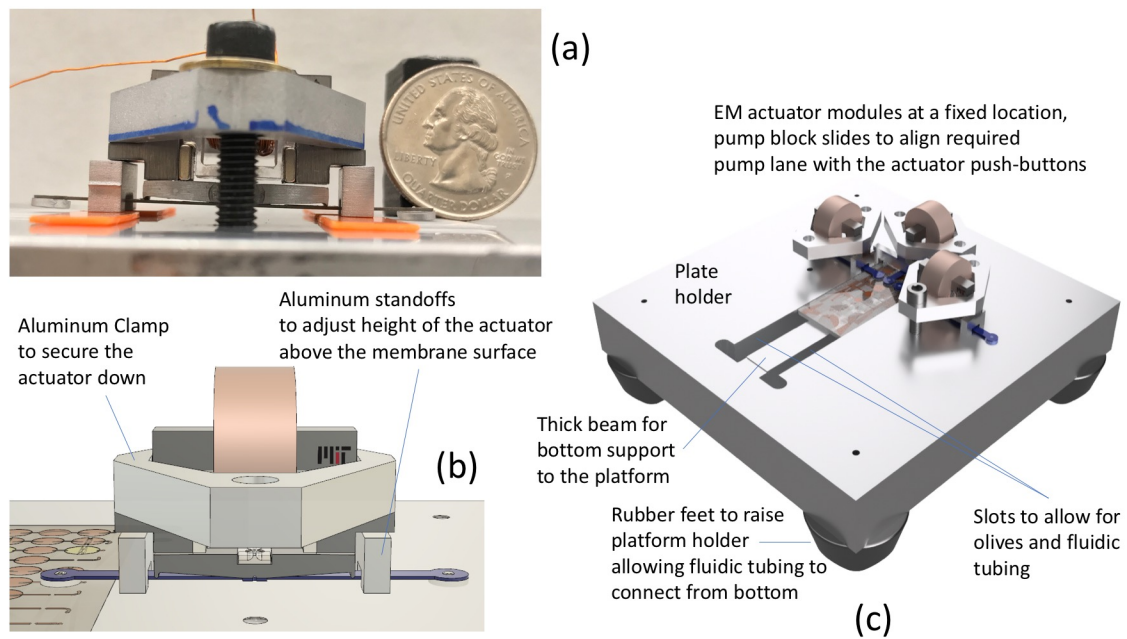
Integration of the EM actuator modules into the EM pump. (a) front view of the assembled actuator with the stator resting on aluminum standoffs. An aluminum clamp secures them to the plate holder using two bolts. (b) CAD model showing standoffs and clamps for clarity. (c) CAD model of the assembly showing the plate holder, the actuators and the fluidic top-plate
